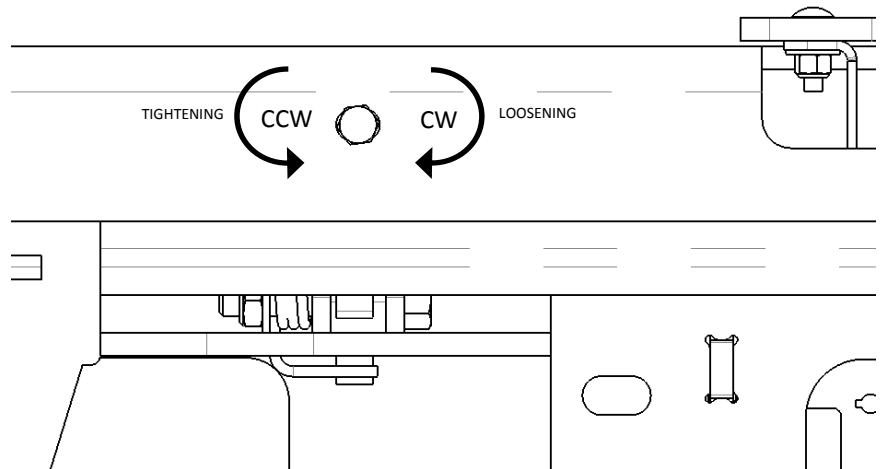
Slam Latch Hanger Adjustment (driver's side shown).
